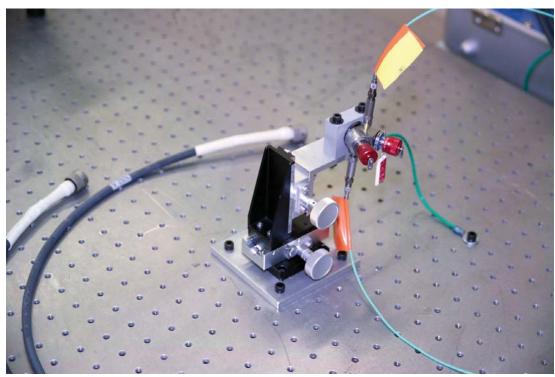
PCA Test Article Mounting and Alignment Fixture
